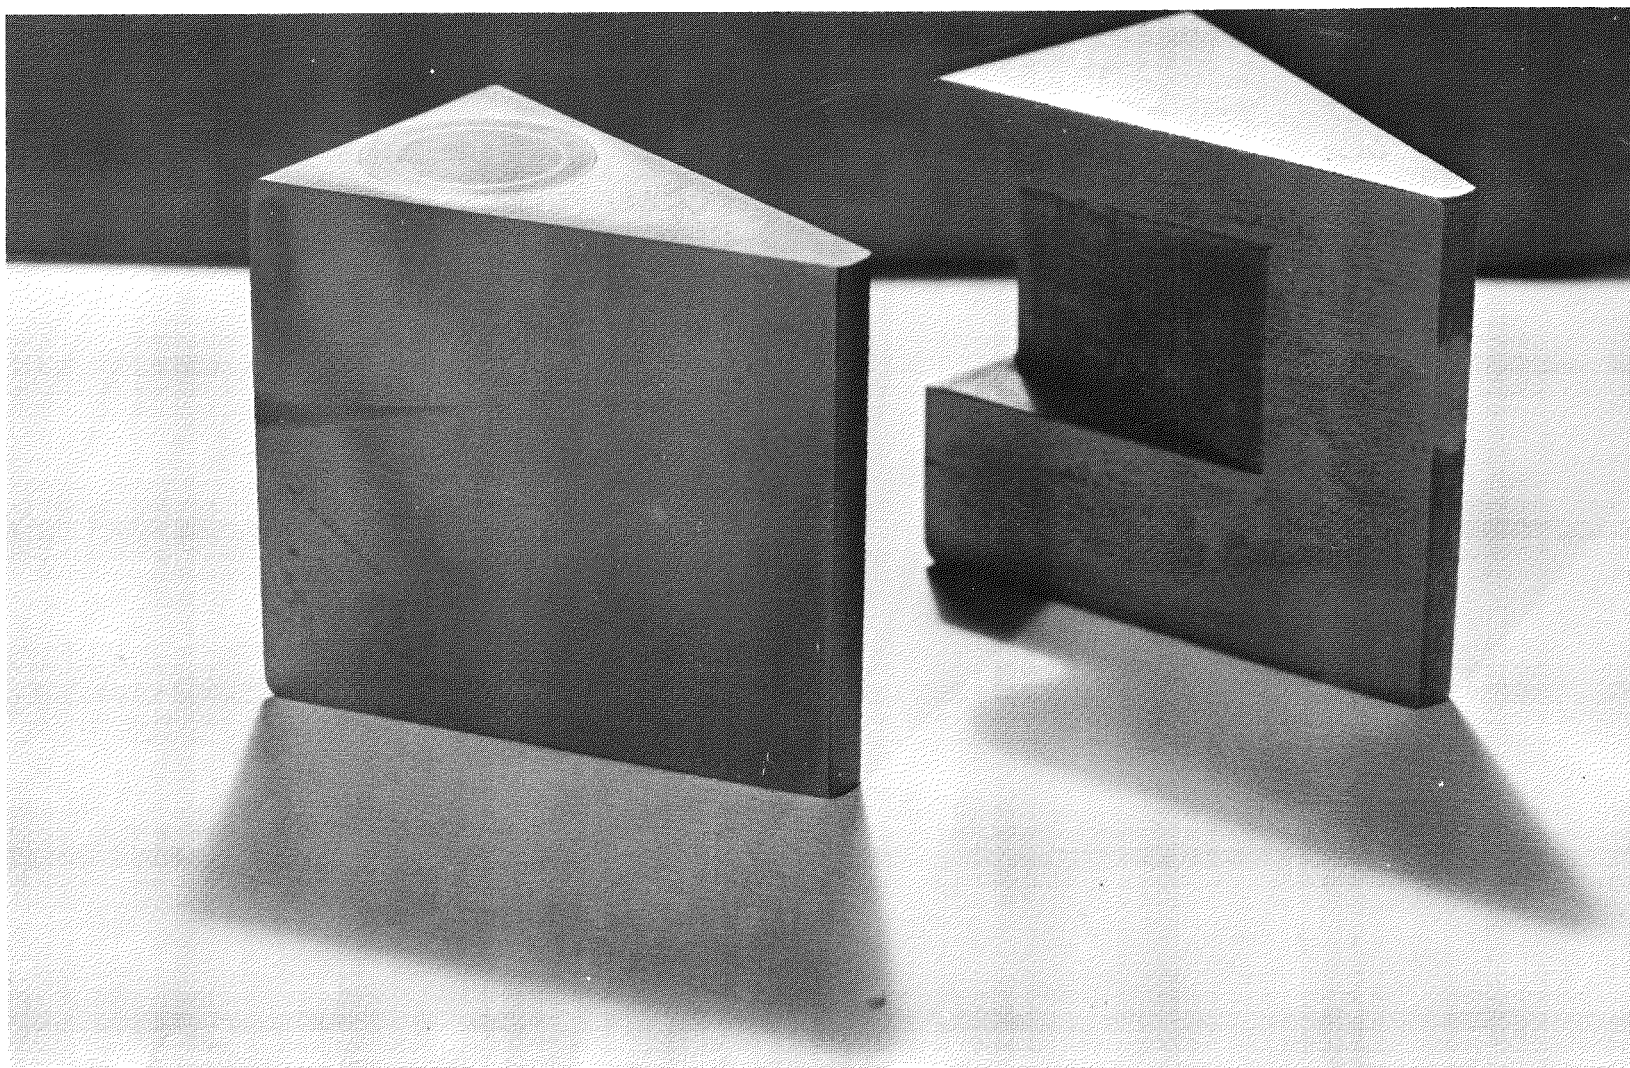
Modified (left) and Standard Striking Tups for the Riehle Impact Testing Machine
